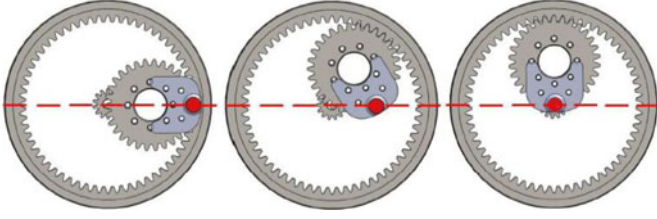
Mechanism to move the pivot along the lever arm. Since the ring gear has a pitch diameter D_r twice as large as the pitch diameter of the planet gear $D_r/2$, a point on the planet gear tracks a straight line.
